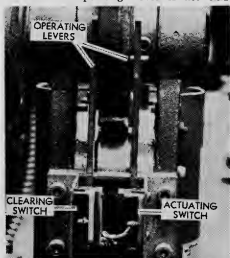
Selectro-Matic Clearing and Actuating Switches
